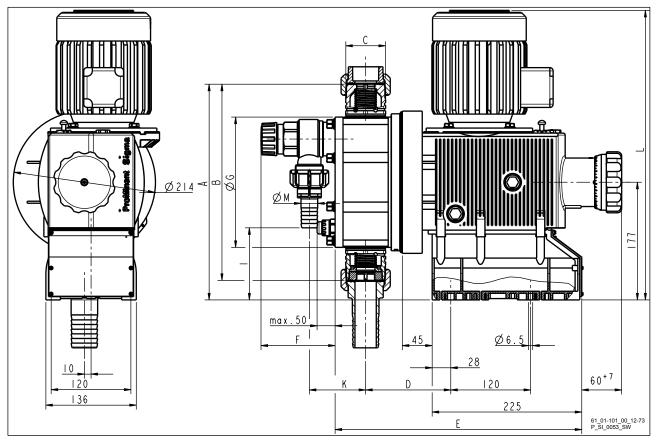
Dimensional drawing of Sigma/ 3, S3Ba - Dimensions in mm - Drawing is not strictly binding.
